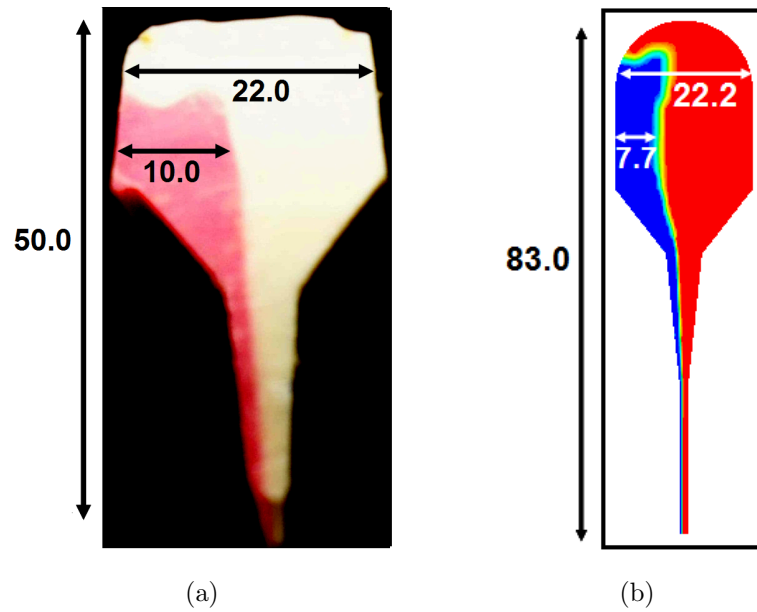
The flow configurations 228 mm into the die body for Sample 3 where (a) shows the die plug structure and (b) shows the CFD structure. All dimensions shown are in millimetres.
